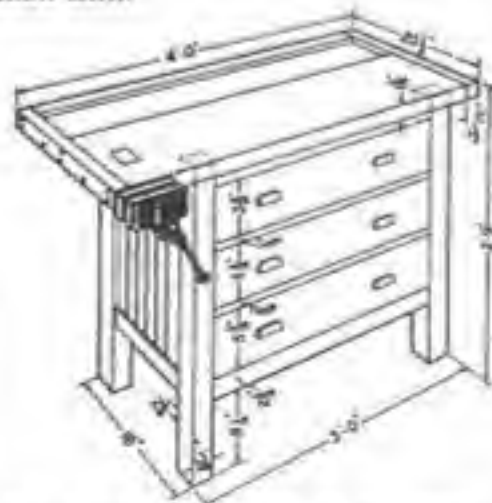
The dimensions of this bench, which is shown to use in Fig. 10, are especially suitable for a small home workshop.
